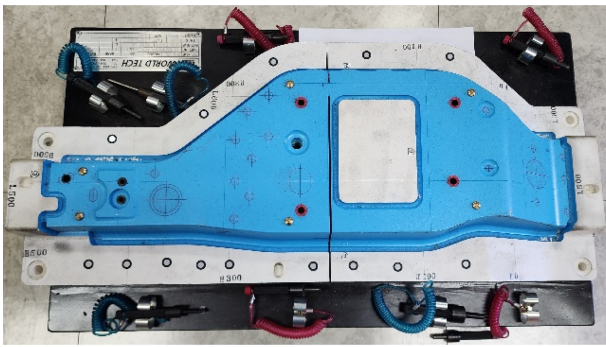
Measurement scene of 3D coordinate measuring machine for radiator support parts
